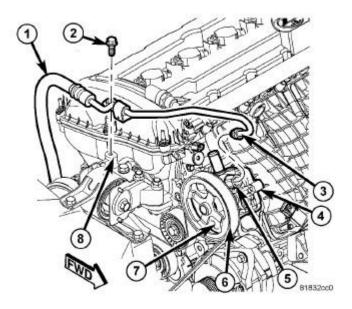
Power Steering Assembly Components Courtesy of CHRYSLER GROUP, LLC
